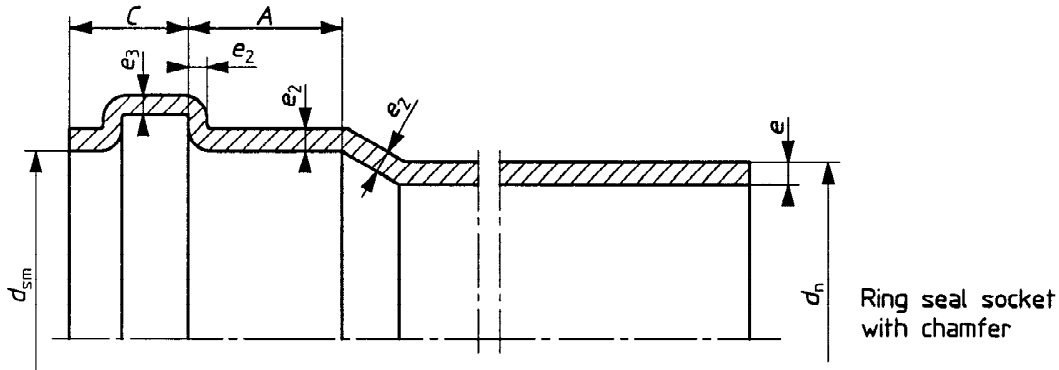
Basic dimensions of sockets for elastomeric ring seal joints
